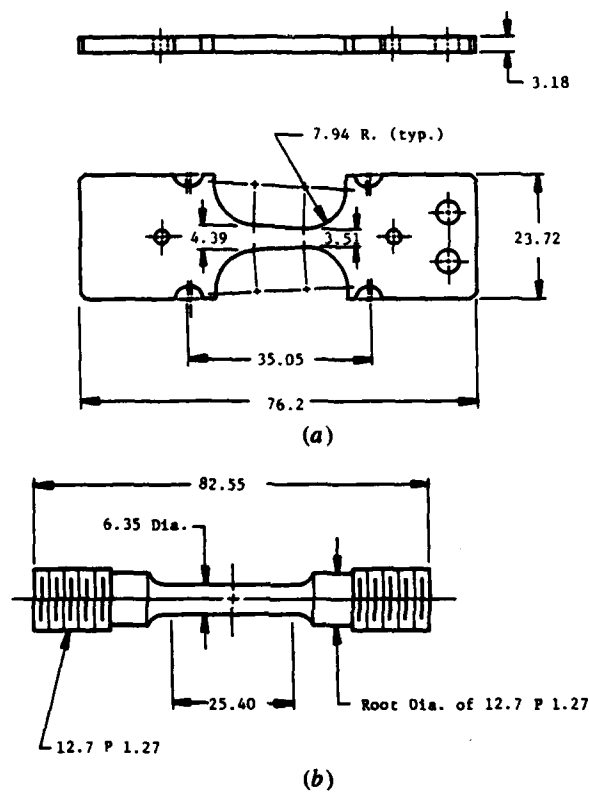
Cantilever Bend and Axial Fatigue Test Specimen Geometries (all dimensions are in mm). (a) Cantilever bend specimen. (b) Axial specimen.
